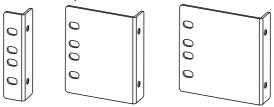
Adjustable Rack Mounting Brackets (19-inch, 23-inch, and 24-inch).
